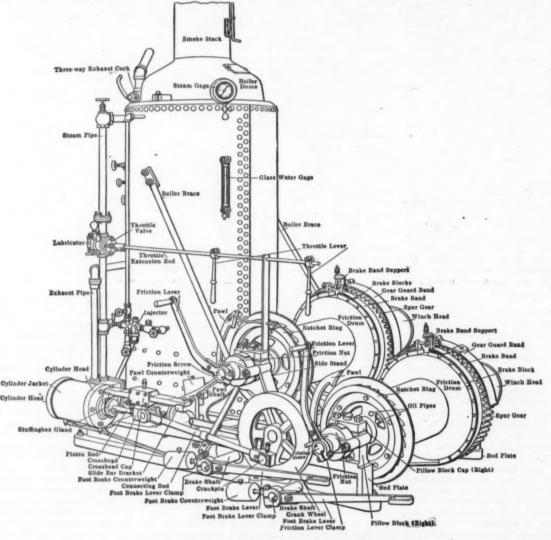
NAMES OF BOILER AND ENGINE PARTS.
